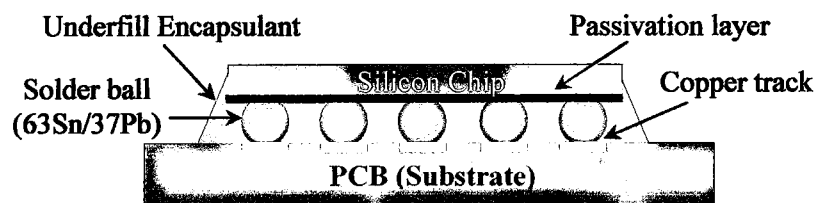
Cross Sectional View of a Typical Flip Chip Assembly
